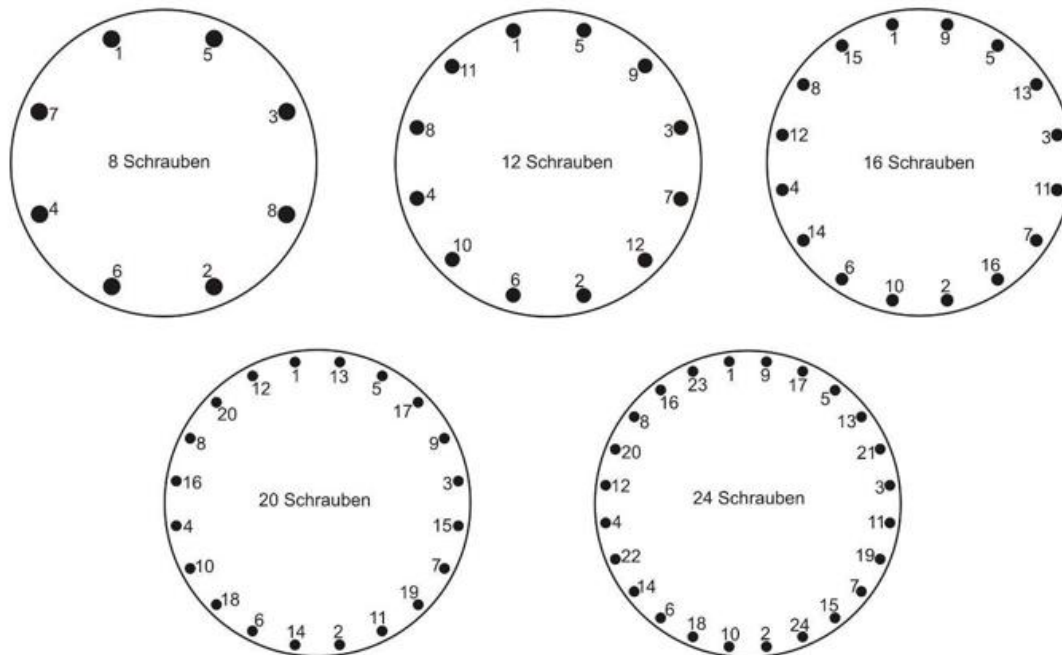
Tightening procedure (source: VCI on the assembly of flange connections in process plants)
